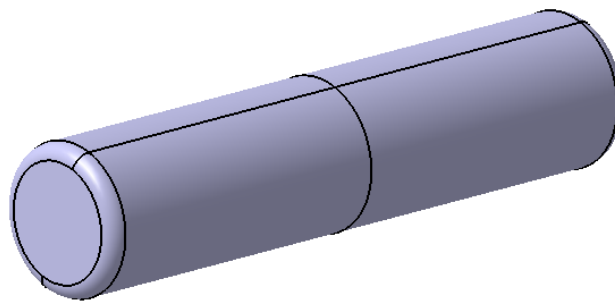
Fuel Tank Catia-v5 CAD Drawing
